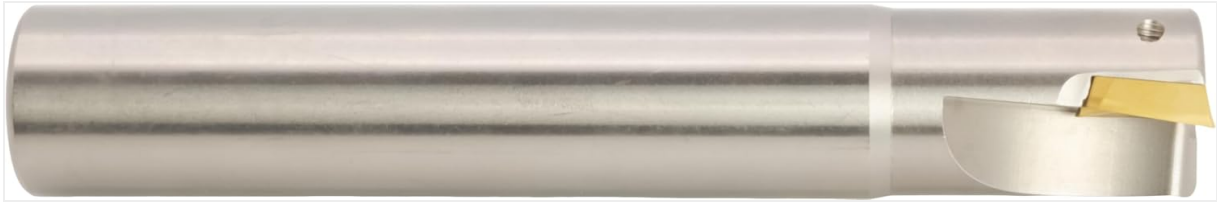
A close-up view of the indexable carbide insert securely fastened in the end mill body.
